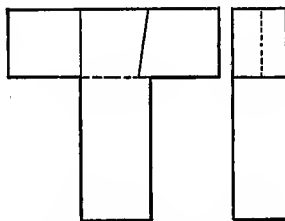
Mechanical Drawing of Half Dove-Tail Joint
